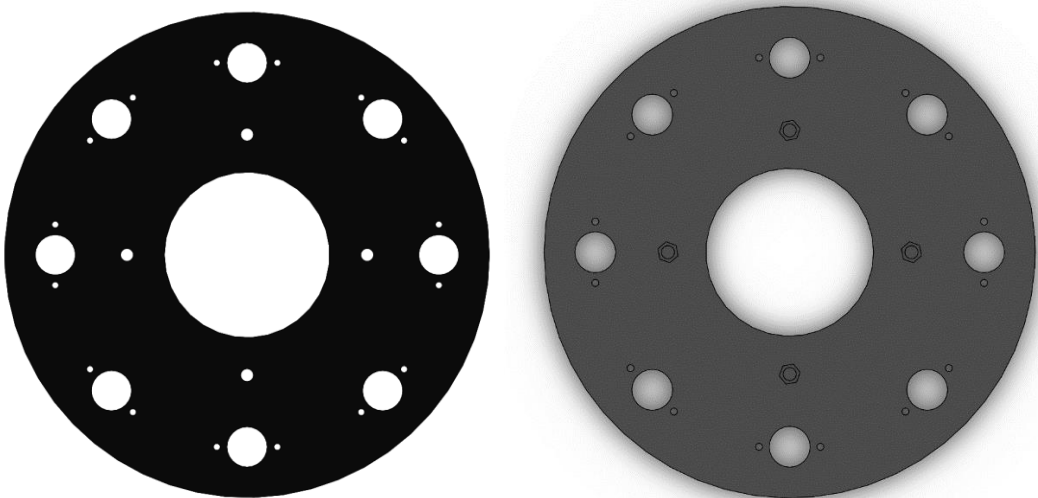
The CAD drawing of the top of the laser mount (left) and the bottom of the laser mount (right)
